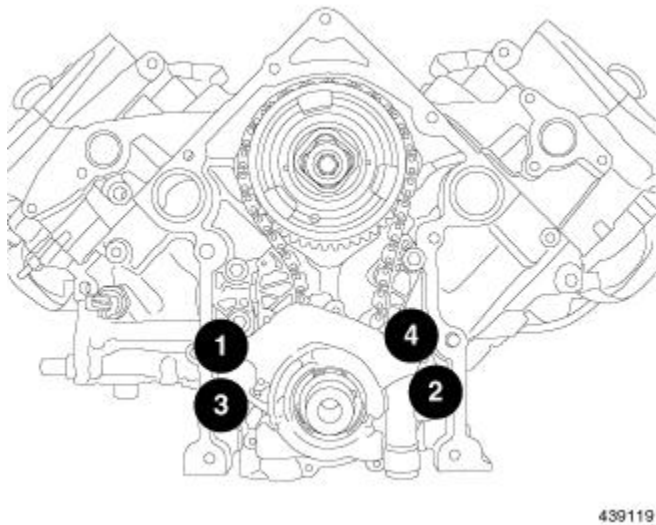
Oil Pump Retaining Bolt Tightening Sequence
